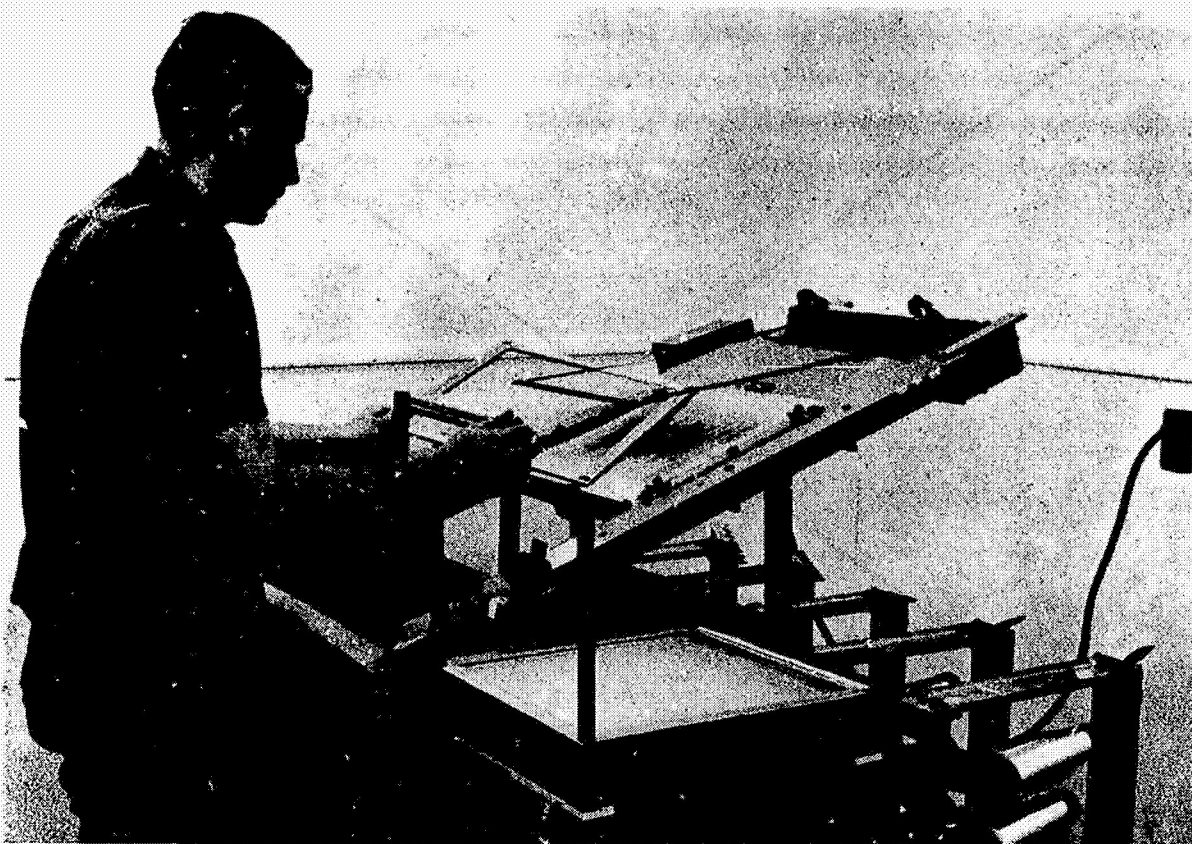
Tile insulation fabrication "X" - "Y" weaving machine.
